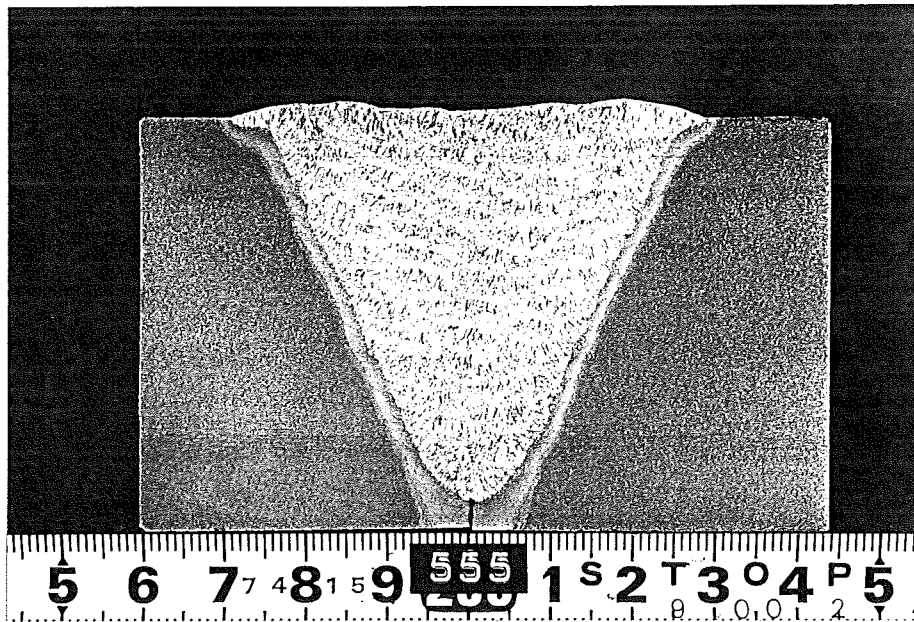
Macrostructure of weld joint with DW-81B2
